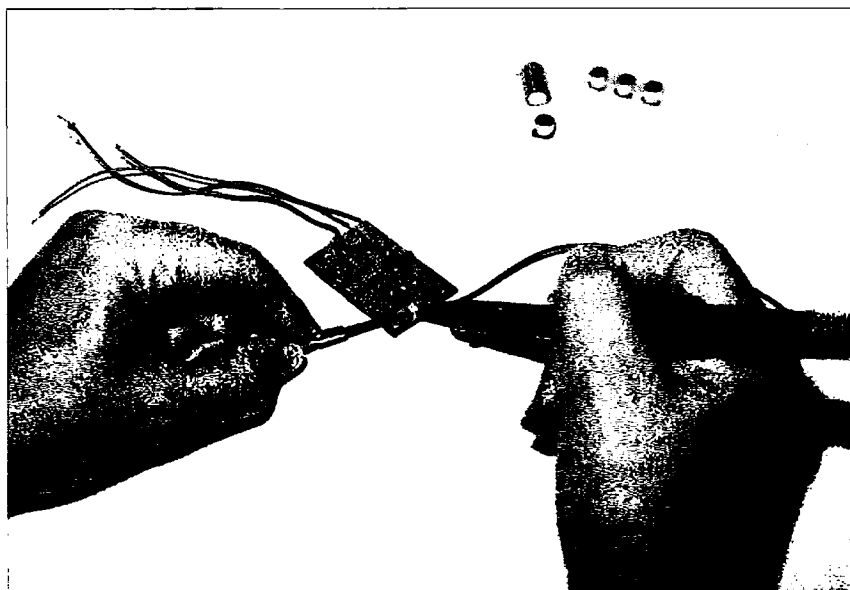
Photo D. Apply heat from the iron and pry up on chip to remove it from soldering pads.
